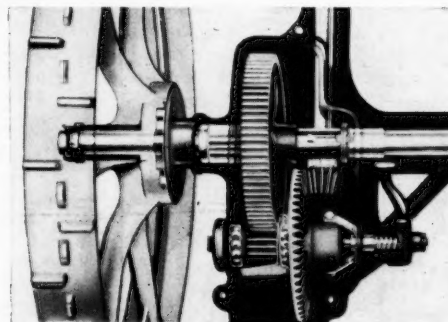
MOWER GEARS OF NICKEL-MOLYBDENUM CAST IRON
